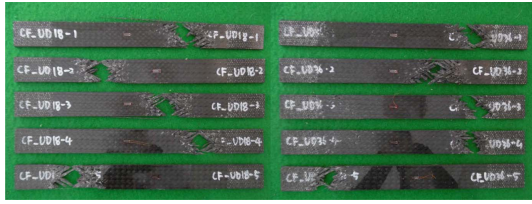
After shape of specimen for UD18 and UD36 in tensile test
